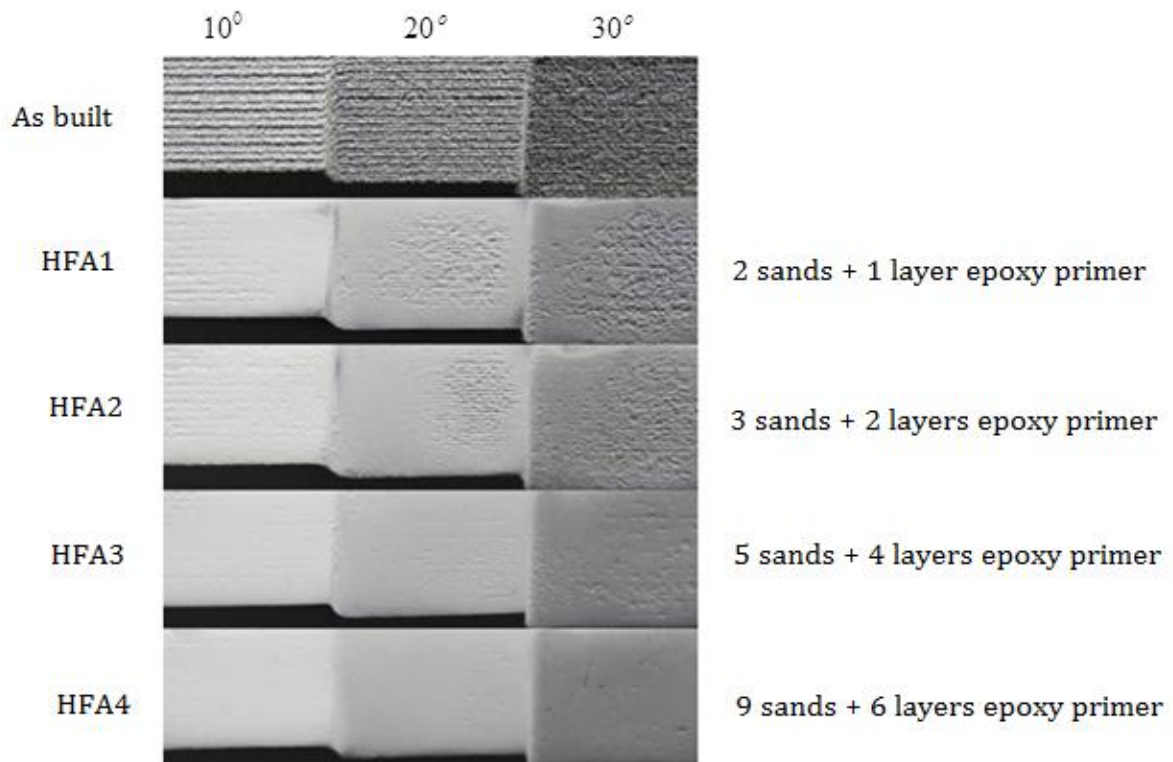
Surface finish improvement of Alumide® test pieces by hand finishing
